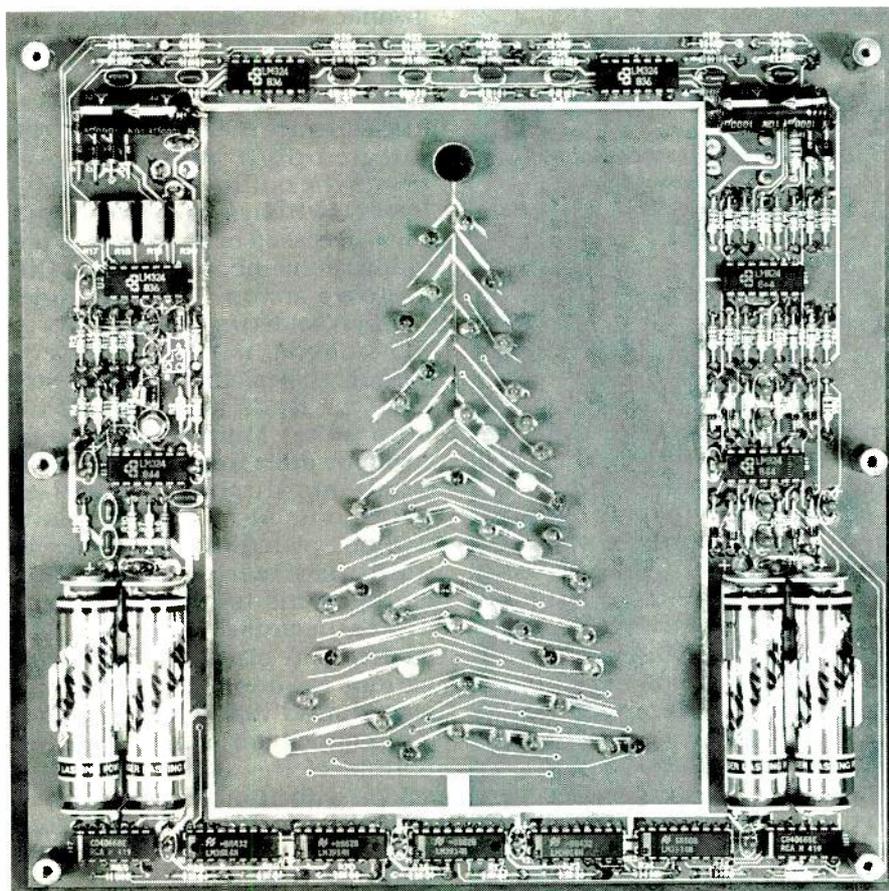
THE SPACERS THAT HOLD THE BOARD in place in the metal frame should be installed early to prevent damage to soldered components.
